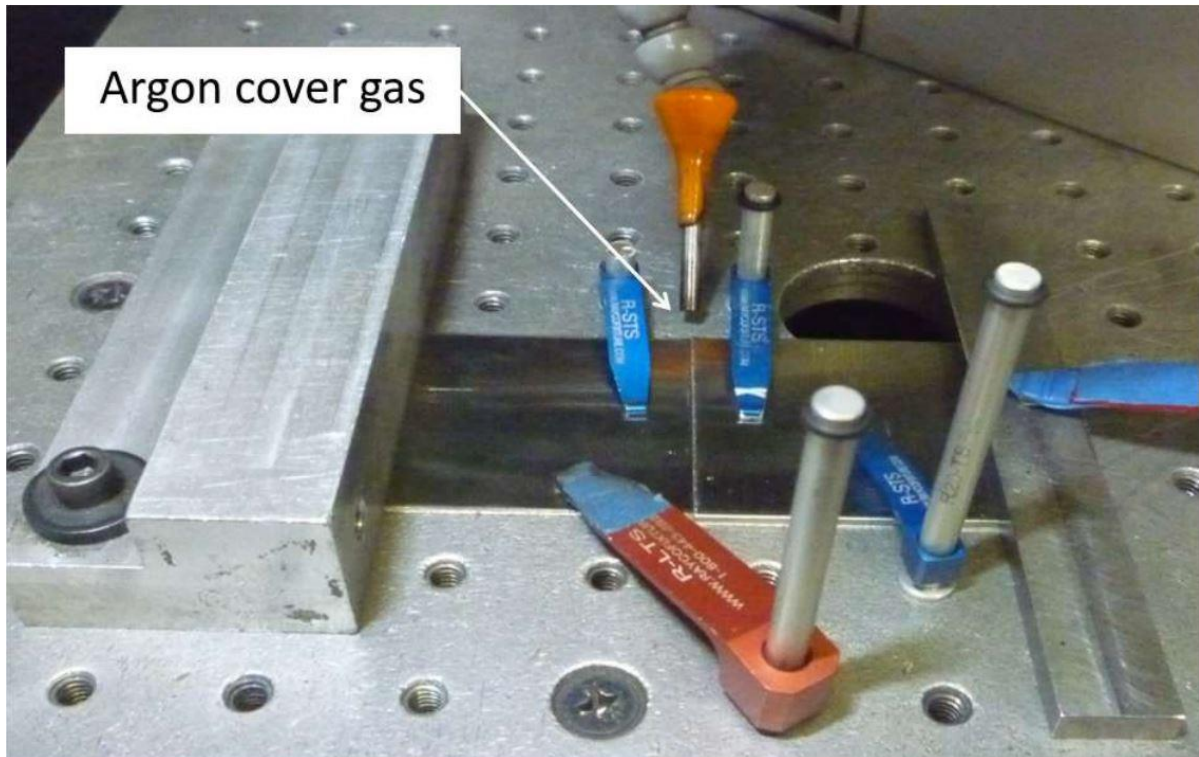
A picture of the welding configuration at MacKay Manufacturing Inc.
